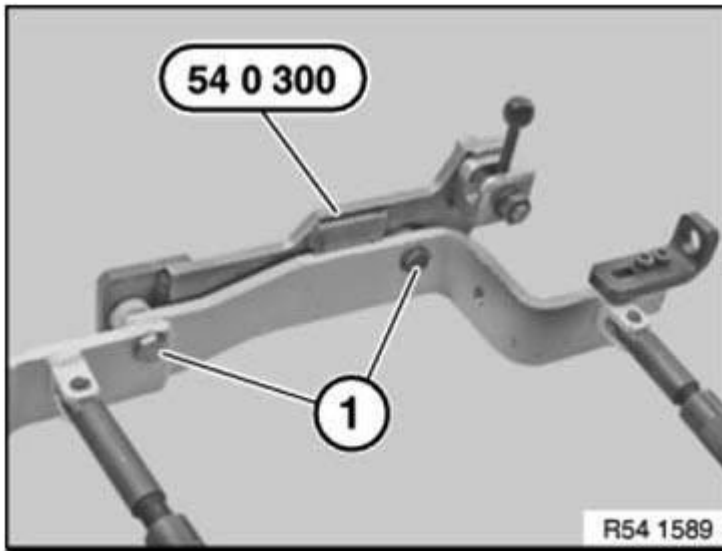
Mounting Adapter Plate 54 0 300 With Bolts On Special Tool 54 0 101
